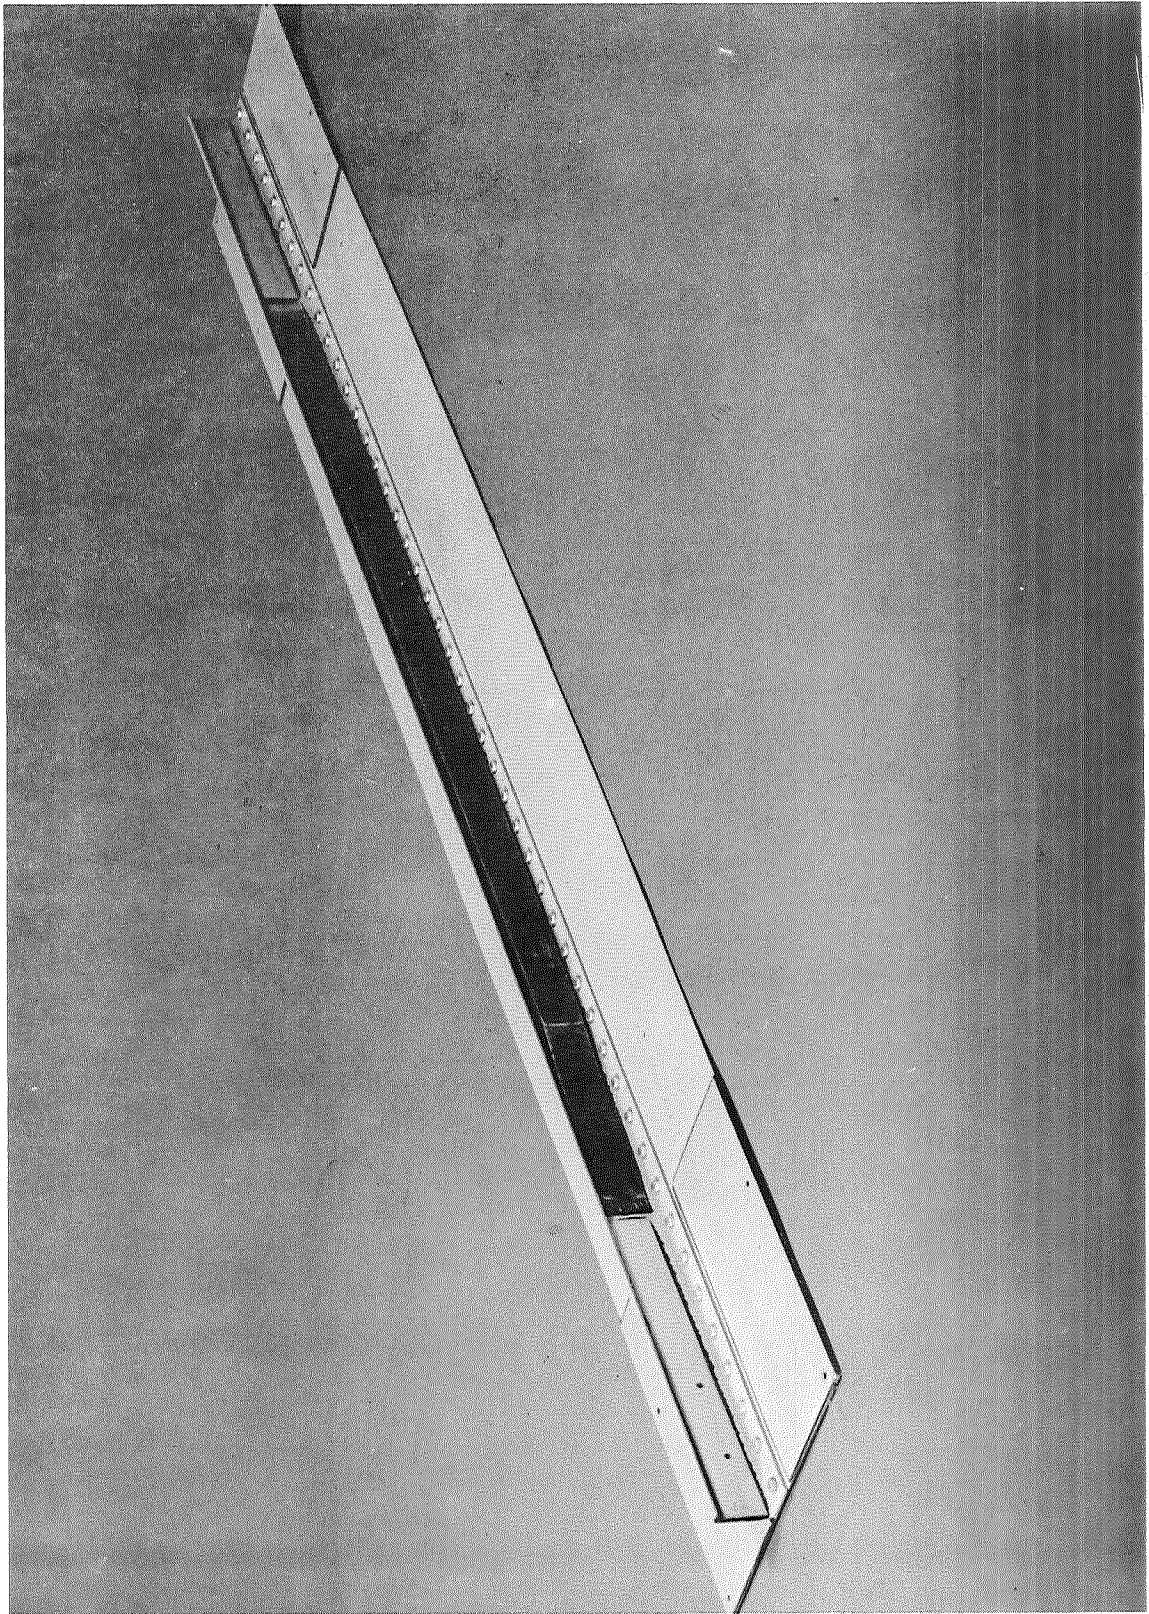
TENSION TEST BORON/EPOXY REINFORCES STRINGER SPECIMEN.
